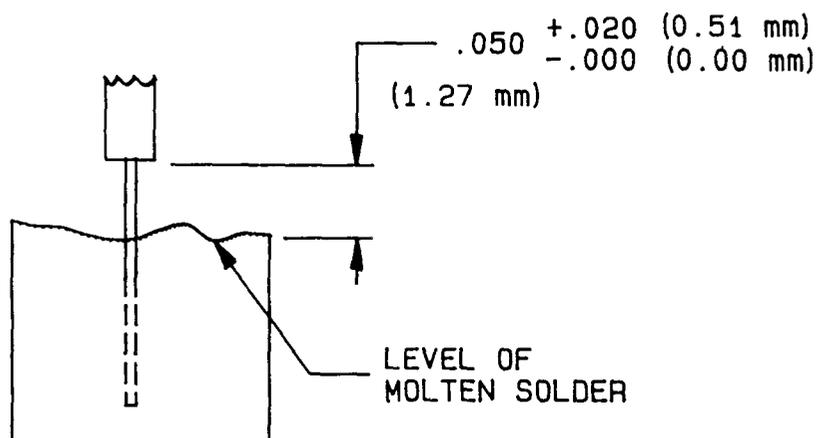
Example of axial wire-lead depth of immersion in molten solder.
